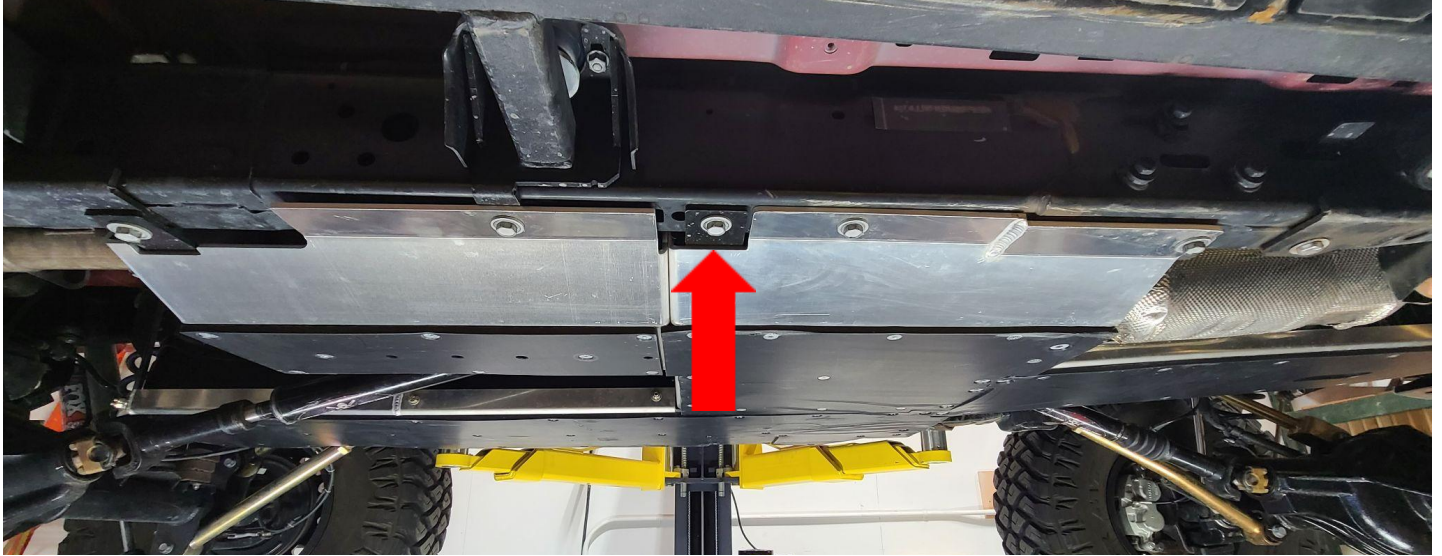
Passenger side of vehicle shown. The red arrow calls out the mounting location used at this step. This will use a factory bolt to fasten the passenger side of main crossmember F (Figure 3 Item #4) to the frame. Please note, at this time the aluminum skids should not be installed
